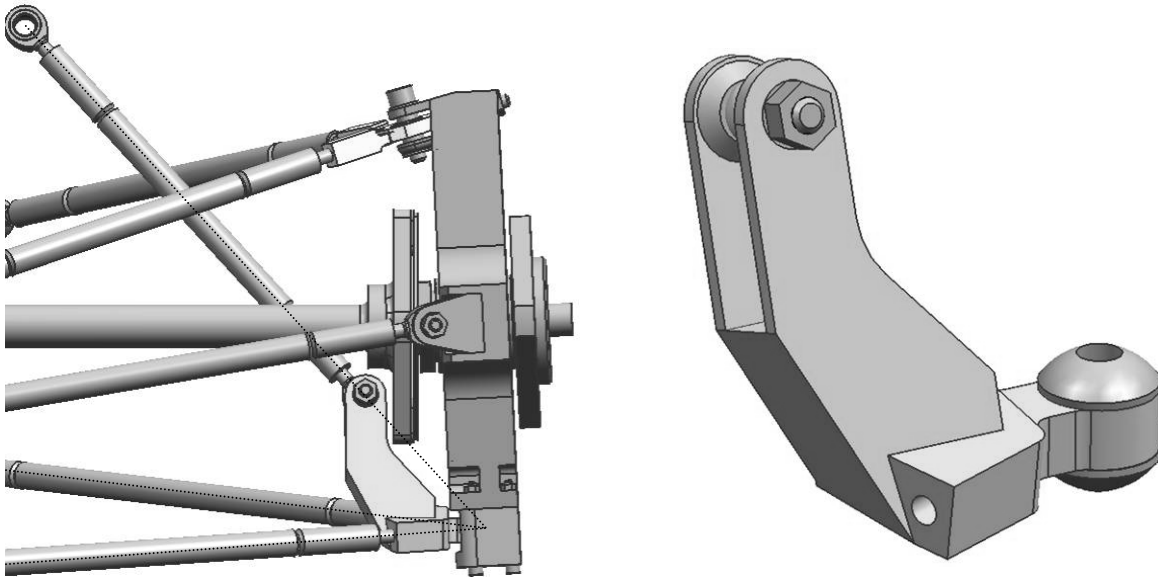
Flexplate intersects with the pushrod centerline, special A-arm connector design
